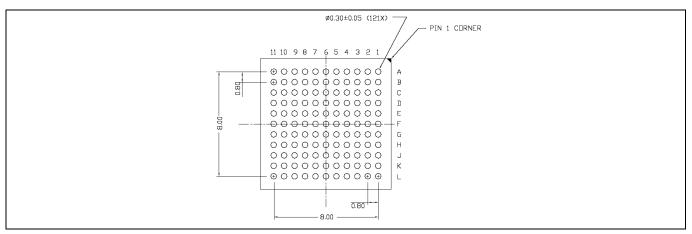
EZ-USB™ FX3/SX3 package dimensions
